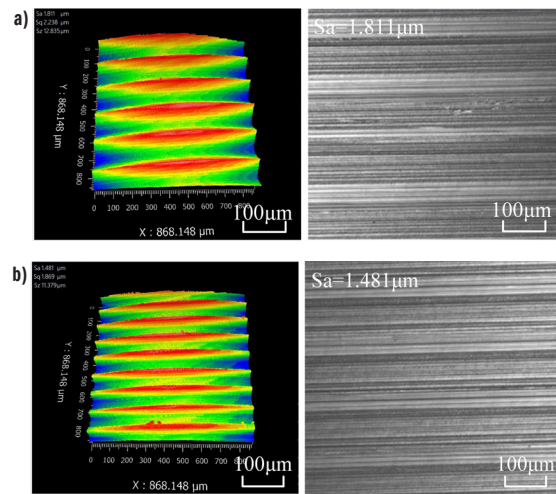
Comparison of surface morphology before and after lubrication; a) 3D surface topography and profile of the workpiece in dry cutting; and b) 3D surface topography and profile of the workpiece under lubricated conditions
